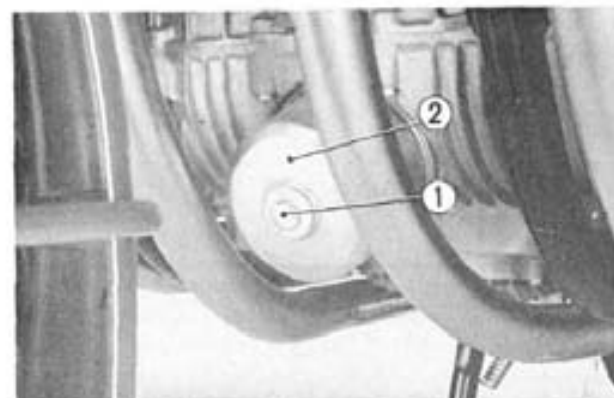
① Oil filter retaining bolt ② Oil filter cover
